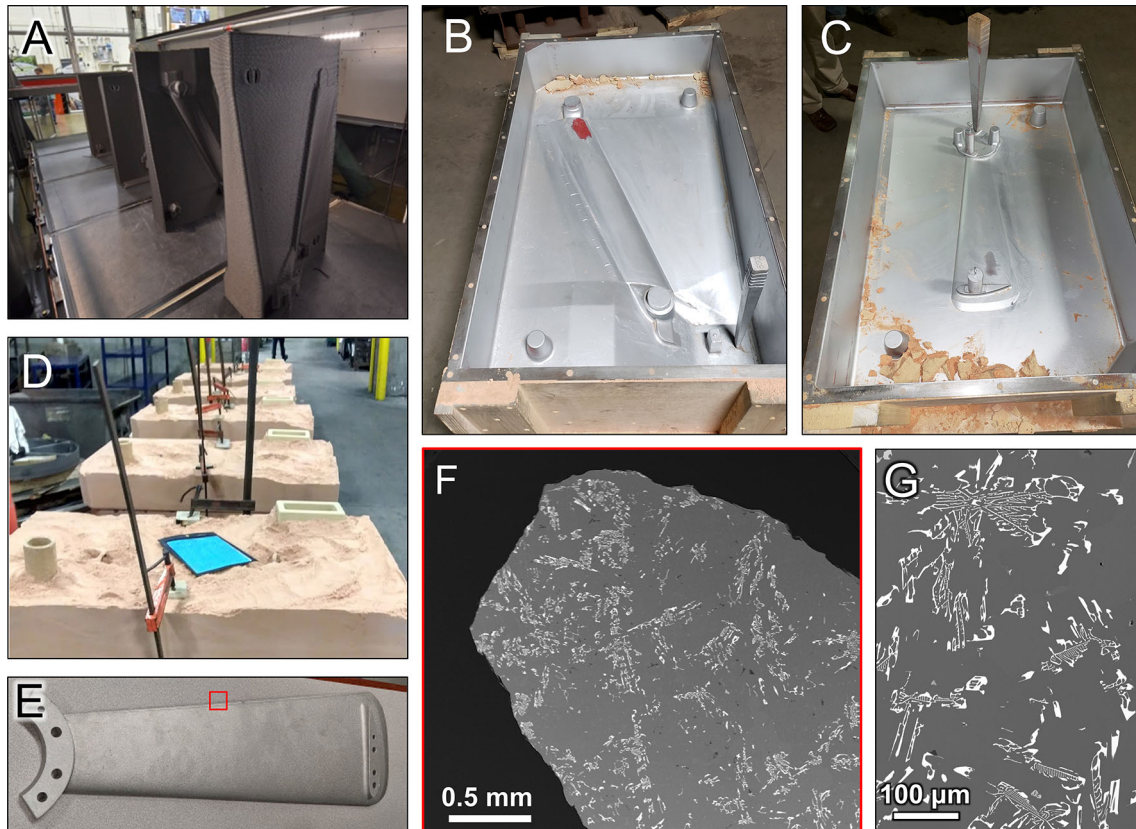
(a) Blade pattern cope and drag being printed on BAAM build bed. Finished, mounted, and coated cope pattern box of (b) blade and (c) spoke design. (d) Sand molds produced from printed patterns awaiting filling with molten aluminum. (e) Cast spoke after the removal of risers and grit blasting. (f, g) SEM micrographs from the trailing edge of the spoke.
